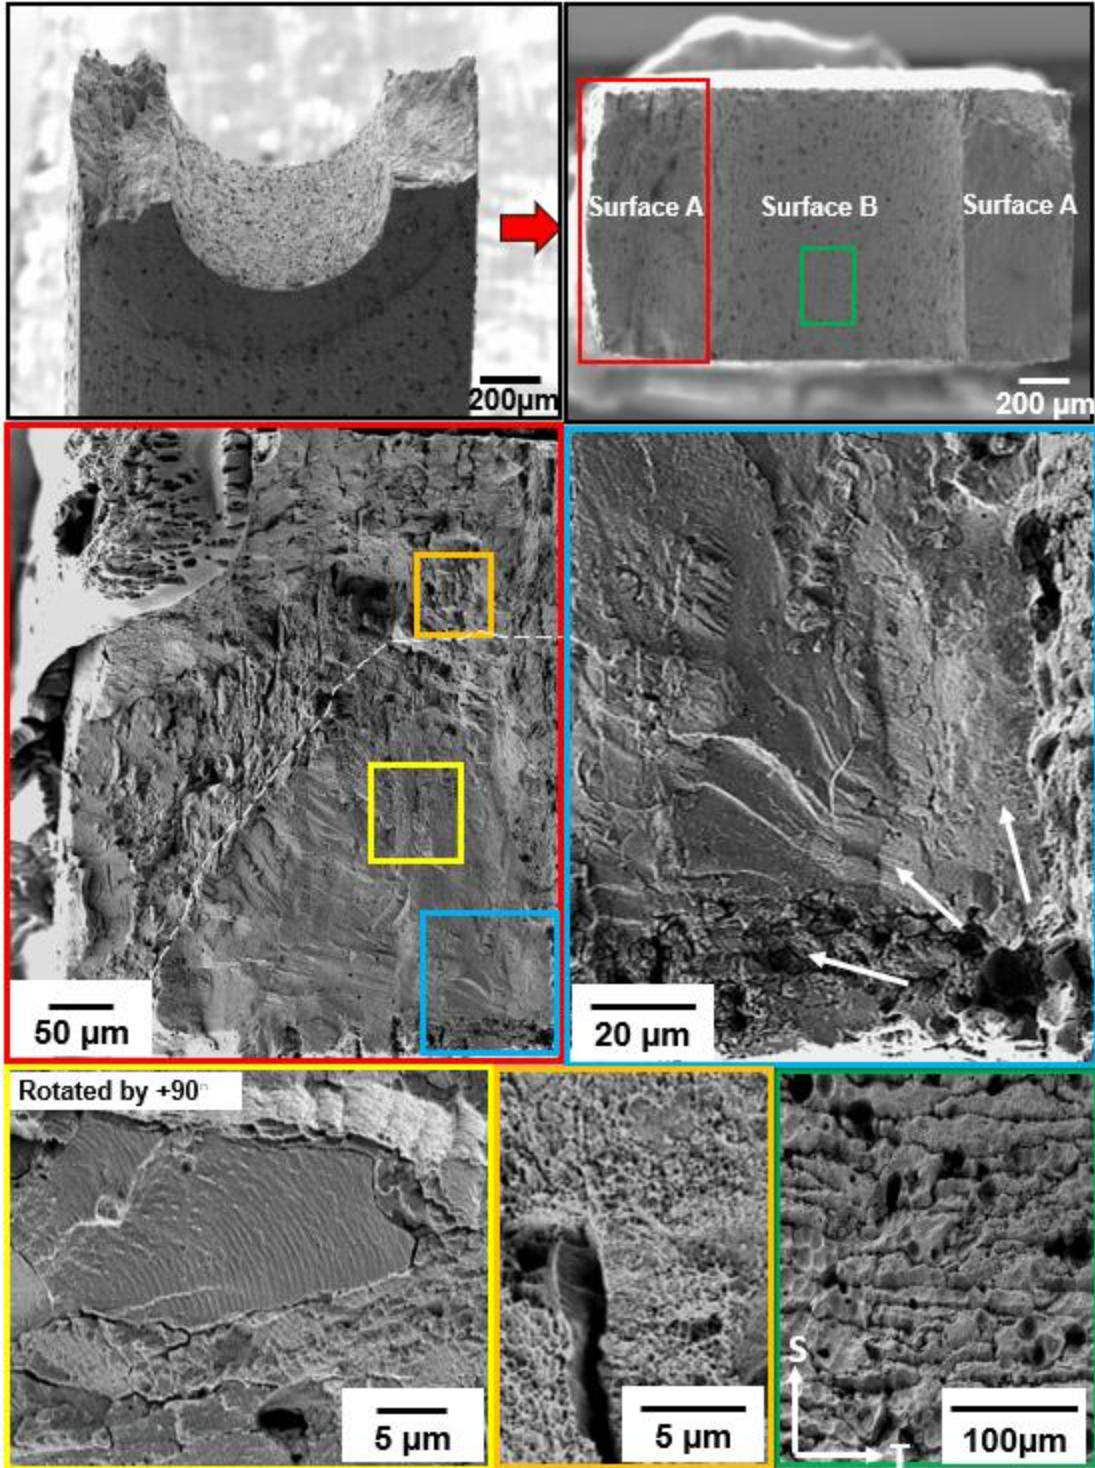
Fractography performed on one fracture surface of the type B specimen whose segmentation is shown in figures 53 and 54. (a) and (b) show an angled (54 degrees) and
